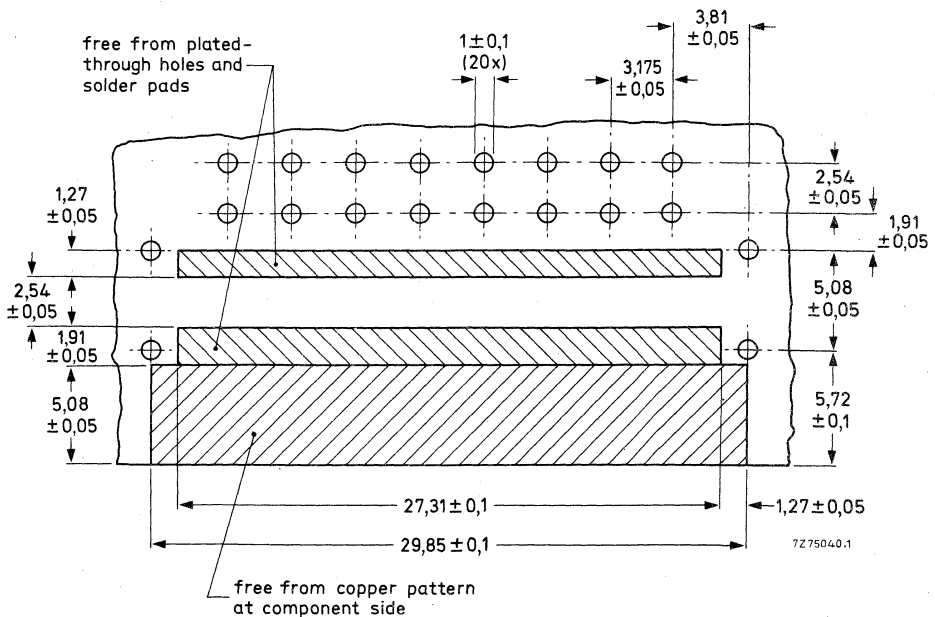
Hole pattern for the spring contact box with 16 pins.
